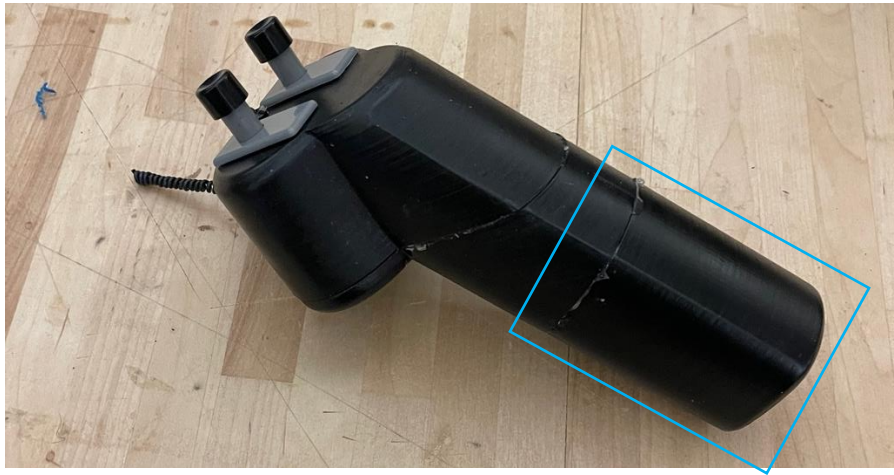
Remote controller housing with the removable battery cover outlined in blue
